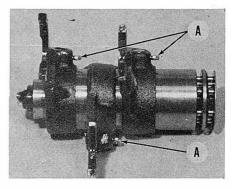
Note position of cotter pin heads (A) on shift forks. Tangs must be bent flat.
